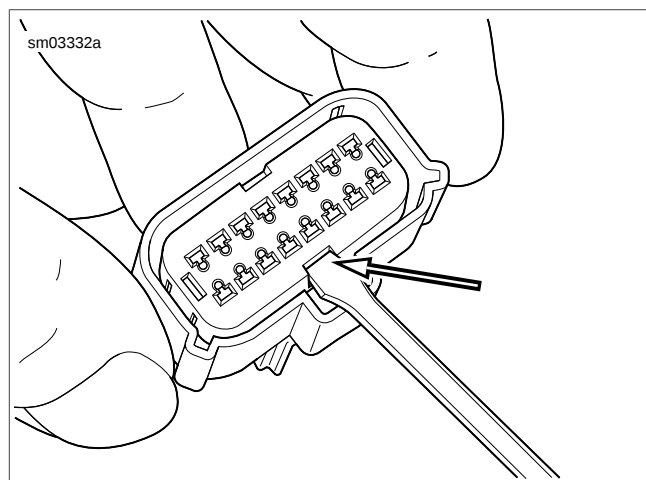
Secondary Lock Pry Slot (Socket Housing)
